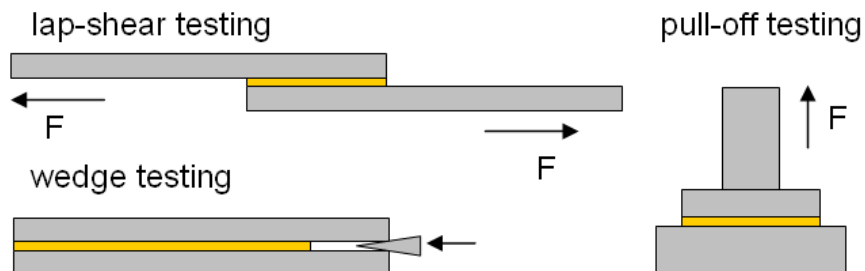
Traditional destructive adhesive testing, test configuration for lap-shear testing (above), wedge testing (below) and pull-off testing (right)
